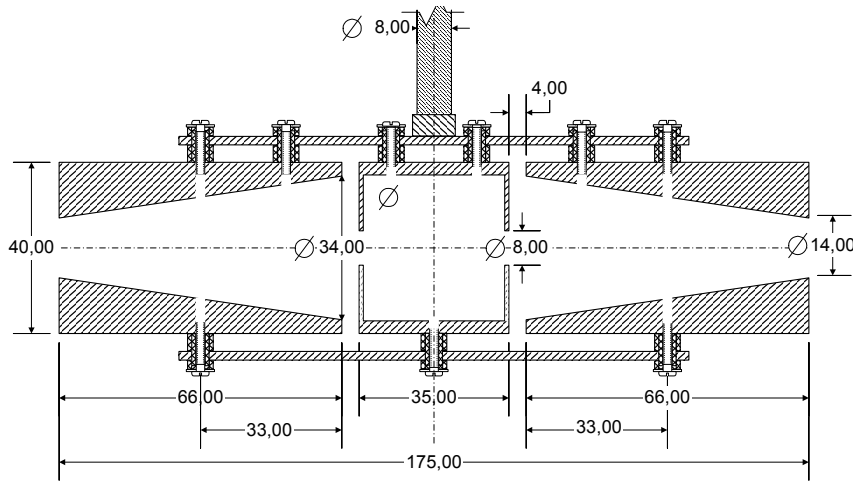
Design of the ConeTrap (all dimensions in mm)
